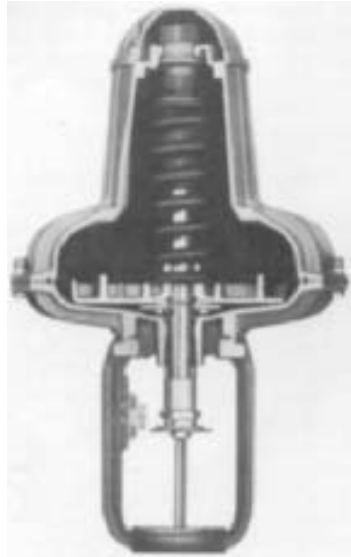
Diaphragm-and-spring actuator, reversible type (Foxboro)
